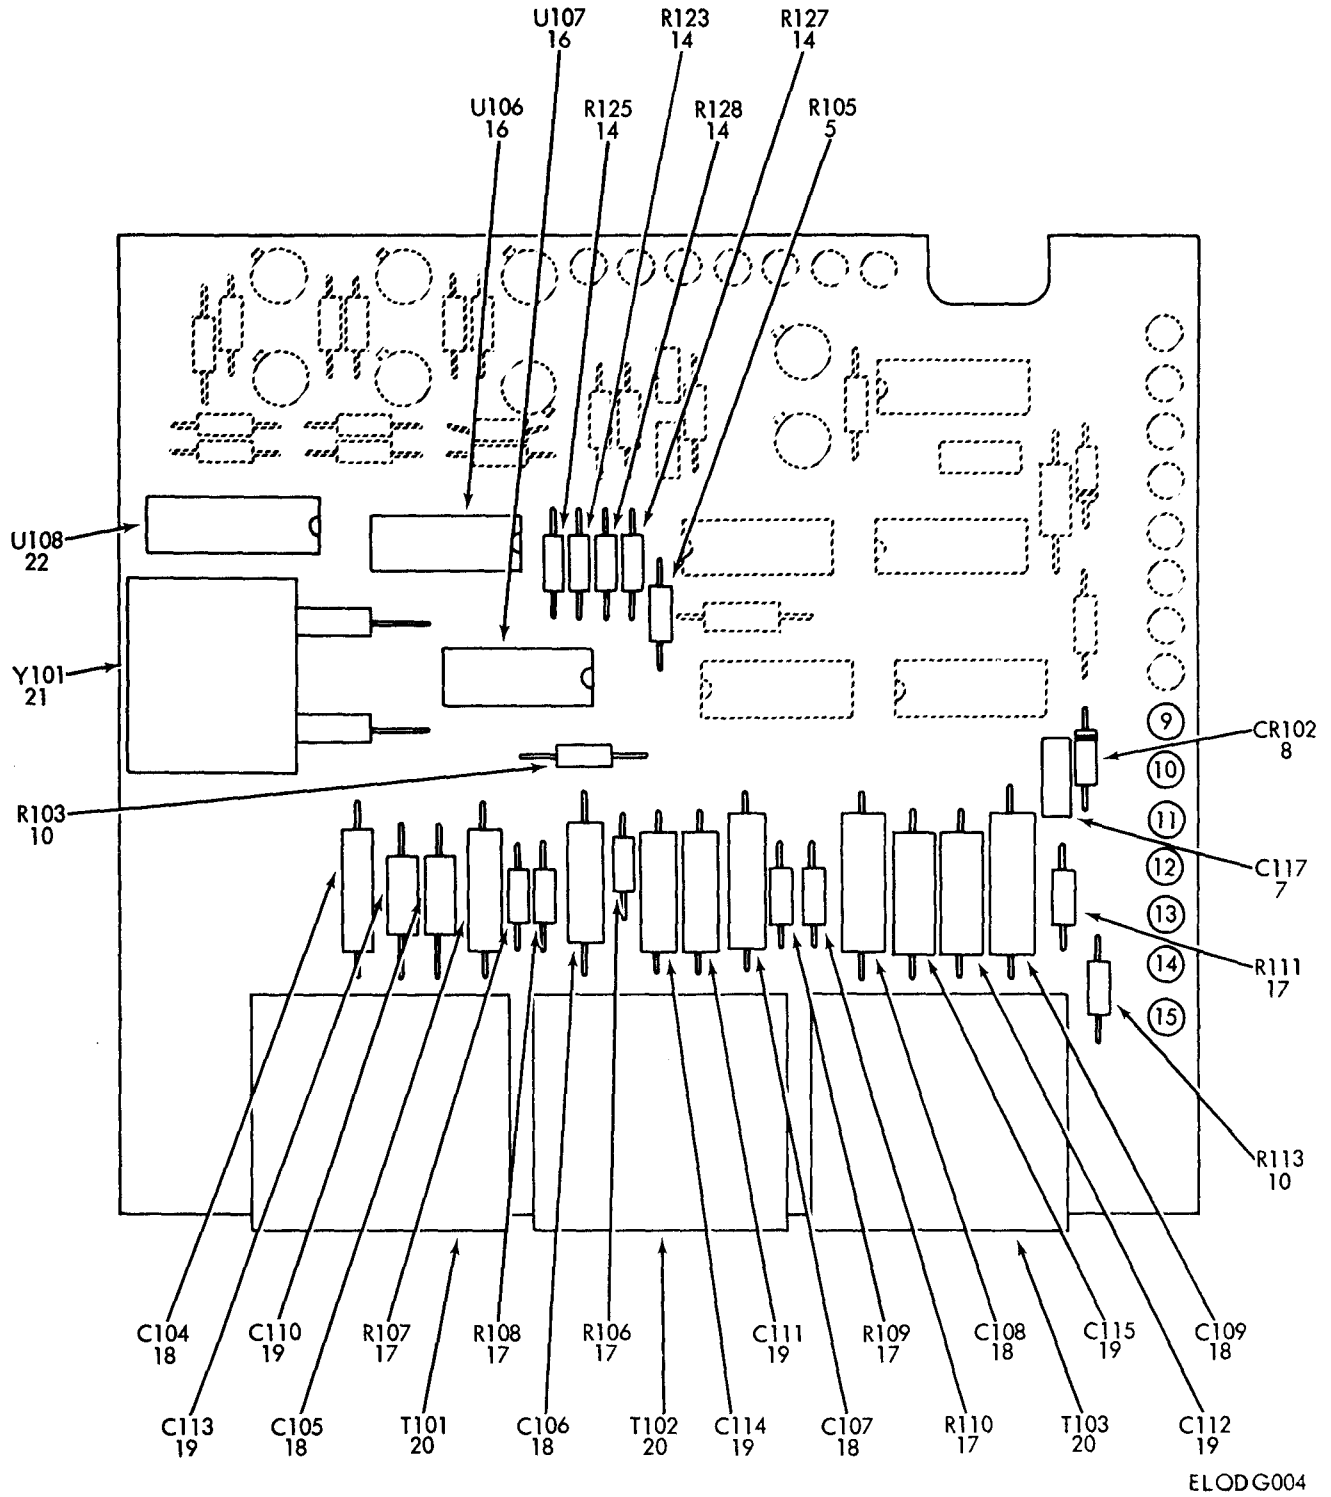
© Printed circuit board assembly, oscillator (sheet 2 of 2).
